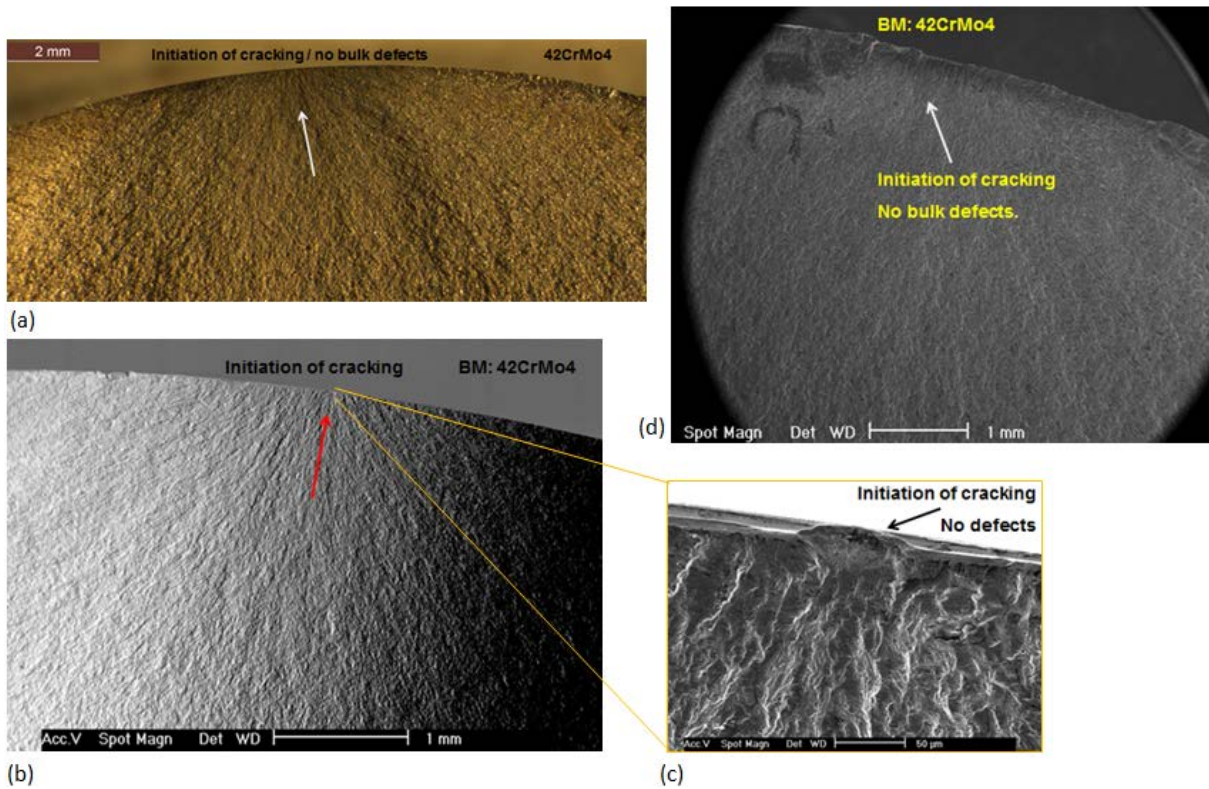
Fracture surface with crack initiation and propagation in the base metal (BM: 42CrMo4) of a cylindrical rod without clad under 4-point bending: (a),(b) surface initiation, (c) magnified location of initiation (no surface defect), (d) initiation in the bulk, no defect
